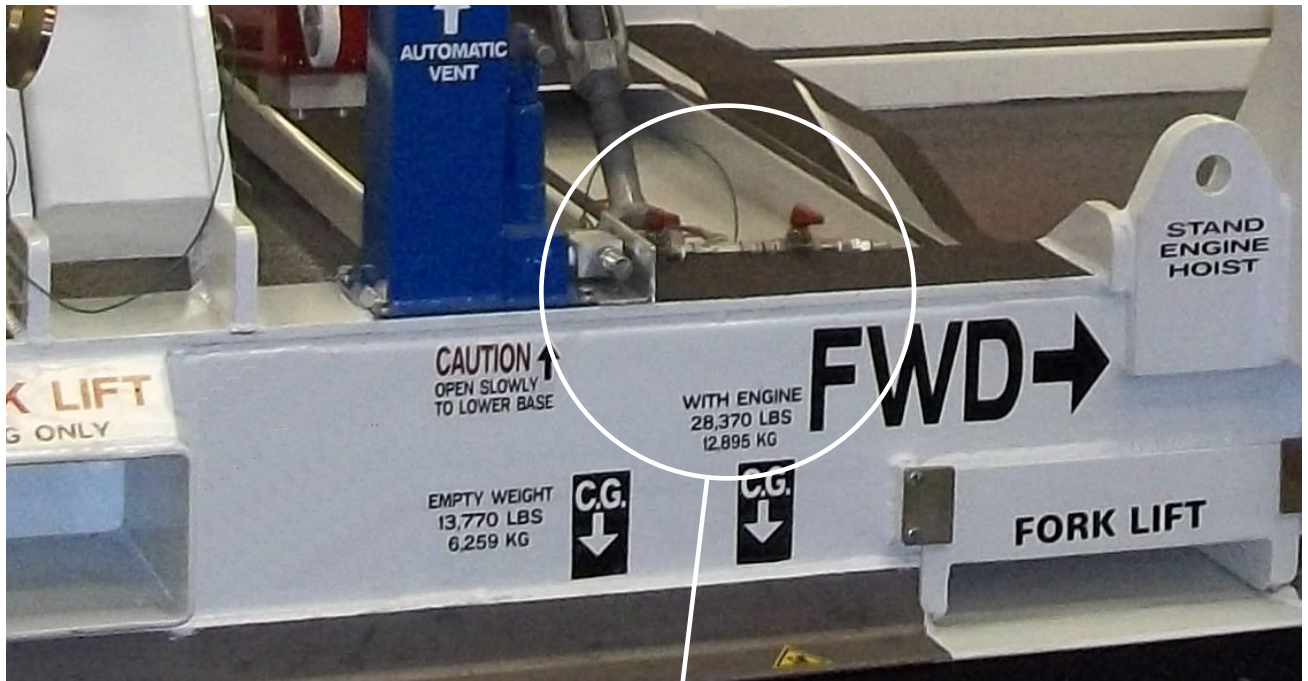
Hydraulic Jack Leg Installation - Configuration 1
